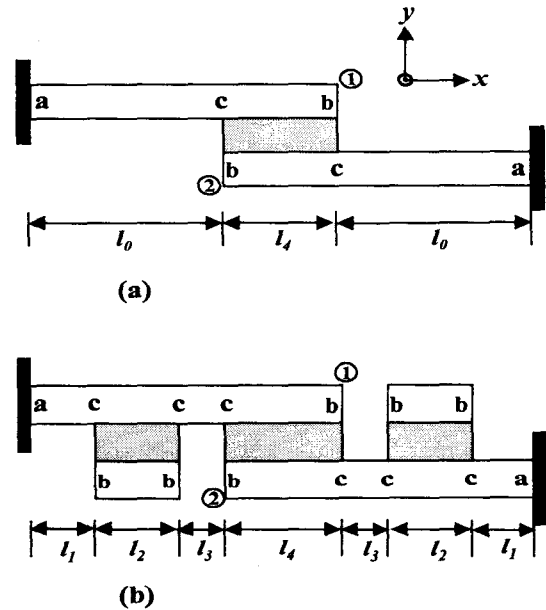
(a) Single lap joint beam and (b) its modified beam with partial layered dampers
